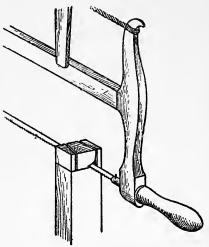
Sawing Out Waste of Large Single Dovetail
